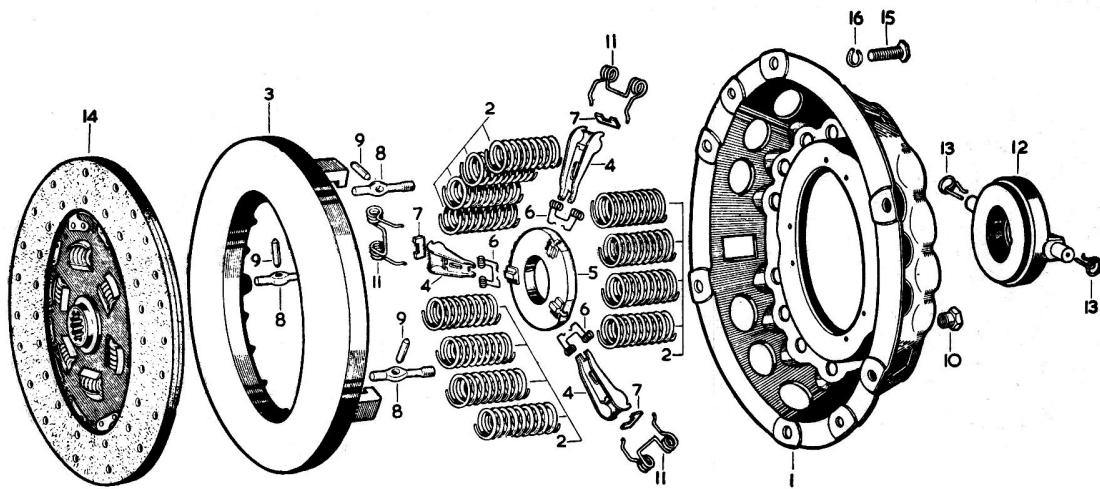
EXPLODED VIEW OF THE 9A6-G/10A6-G CLUTCH
